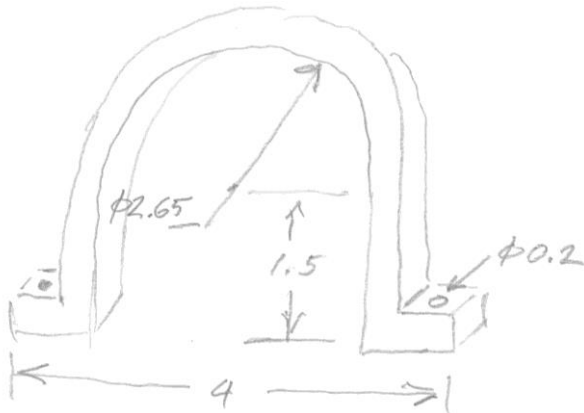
Sketch of hold-down clamp. This sketch shows only dimensions critical to making the part fit and do its job. Missing dimensions will be determined during the detail CAD process.
